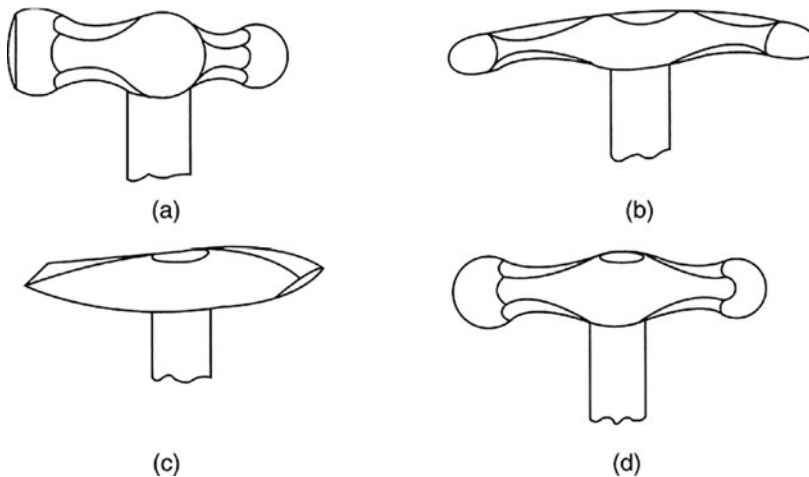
(a) Engineer's ball-pein hammer (b) stretching and flanging hammer (c) wiring hammer (d) hollowing or blocking hammer
